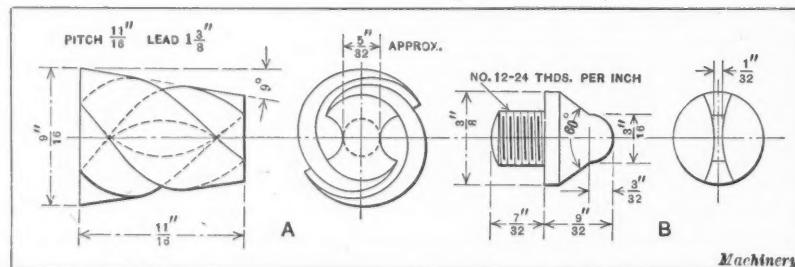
(A) Spiral Center for Mist Nozzle. (B) Dimensions of Cutters used to produce the Grooves on the Spiral Center
